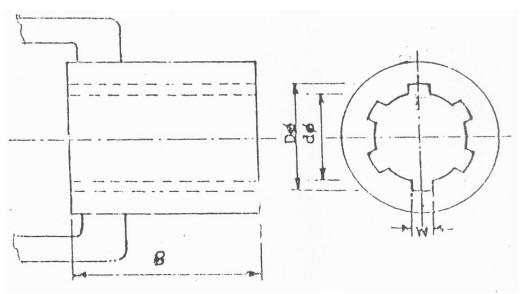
Propeller Shaft Insert Dimensions, (mm)
